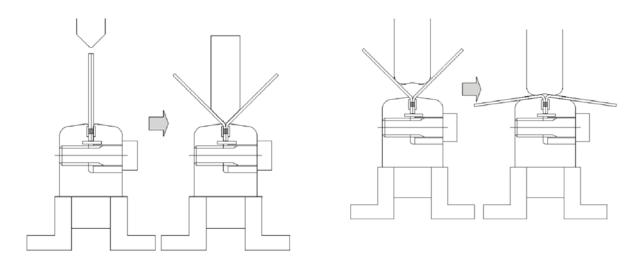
An example of the influence of weld position on test results [Materials: mild steel, Plate thickness (t = 2 mm), weld diameter ( $d_W = 5\sqrt{t}$ )]
